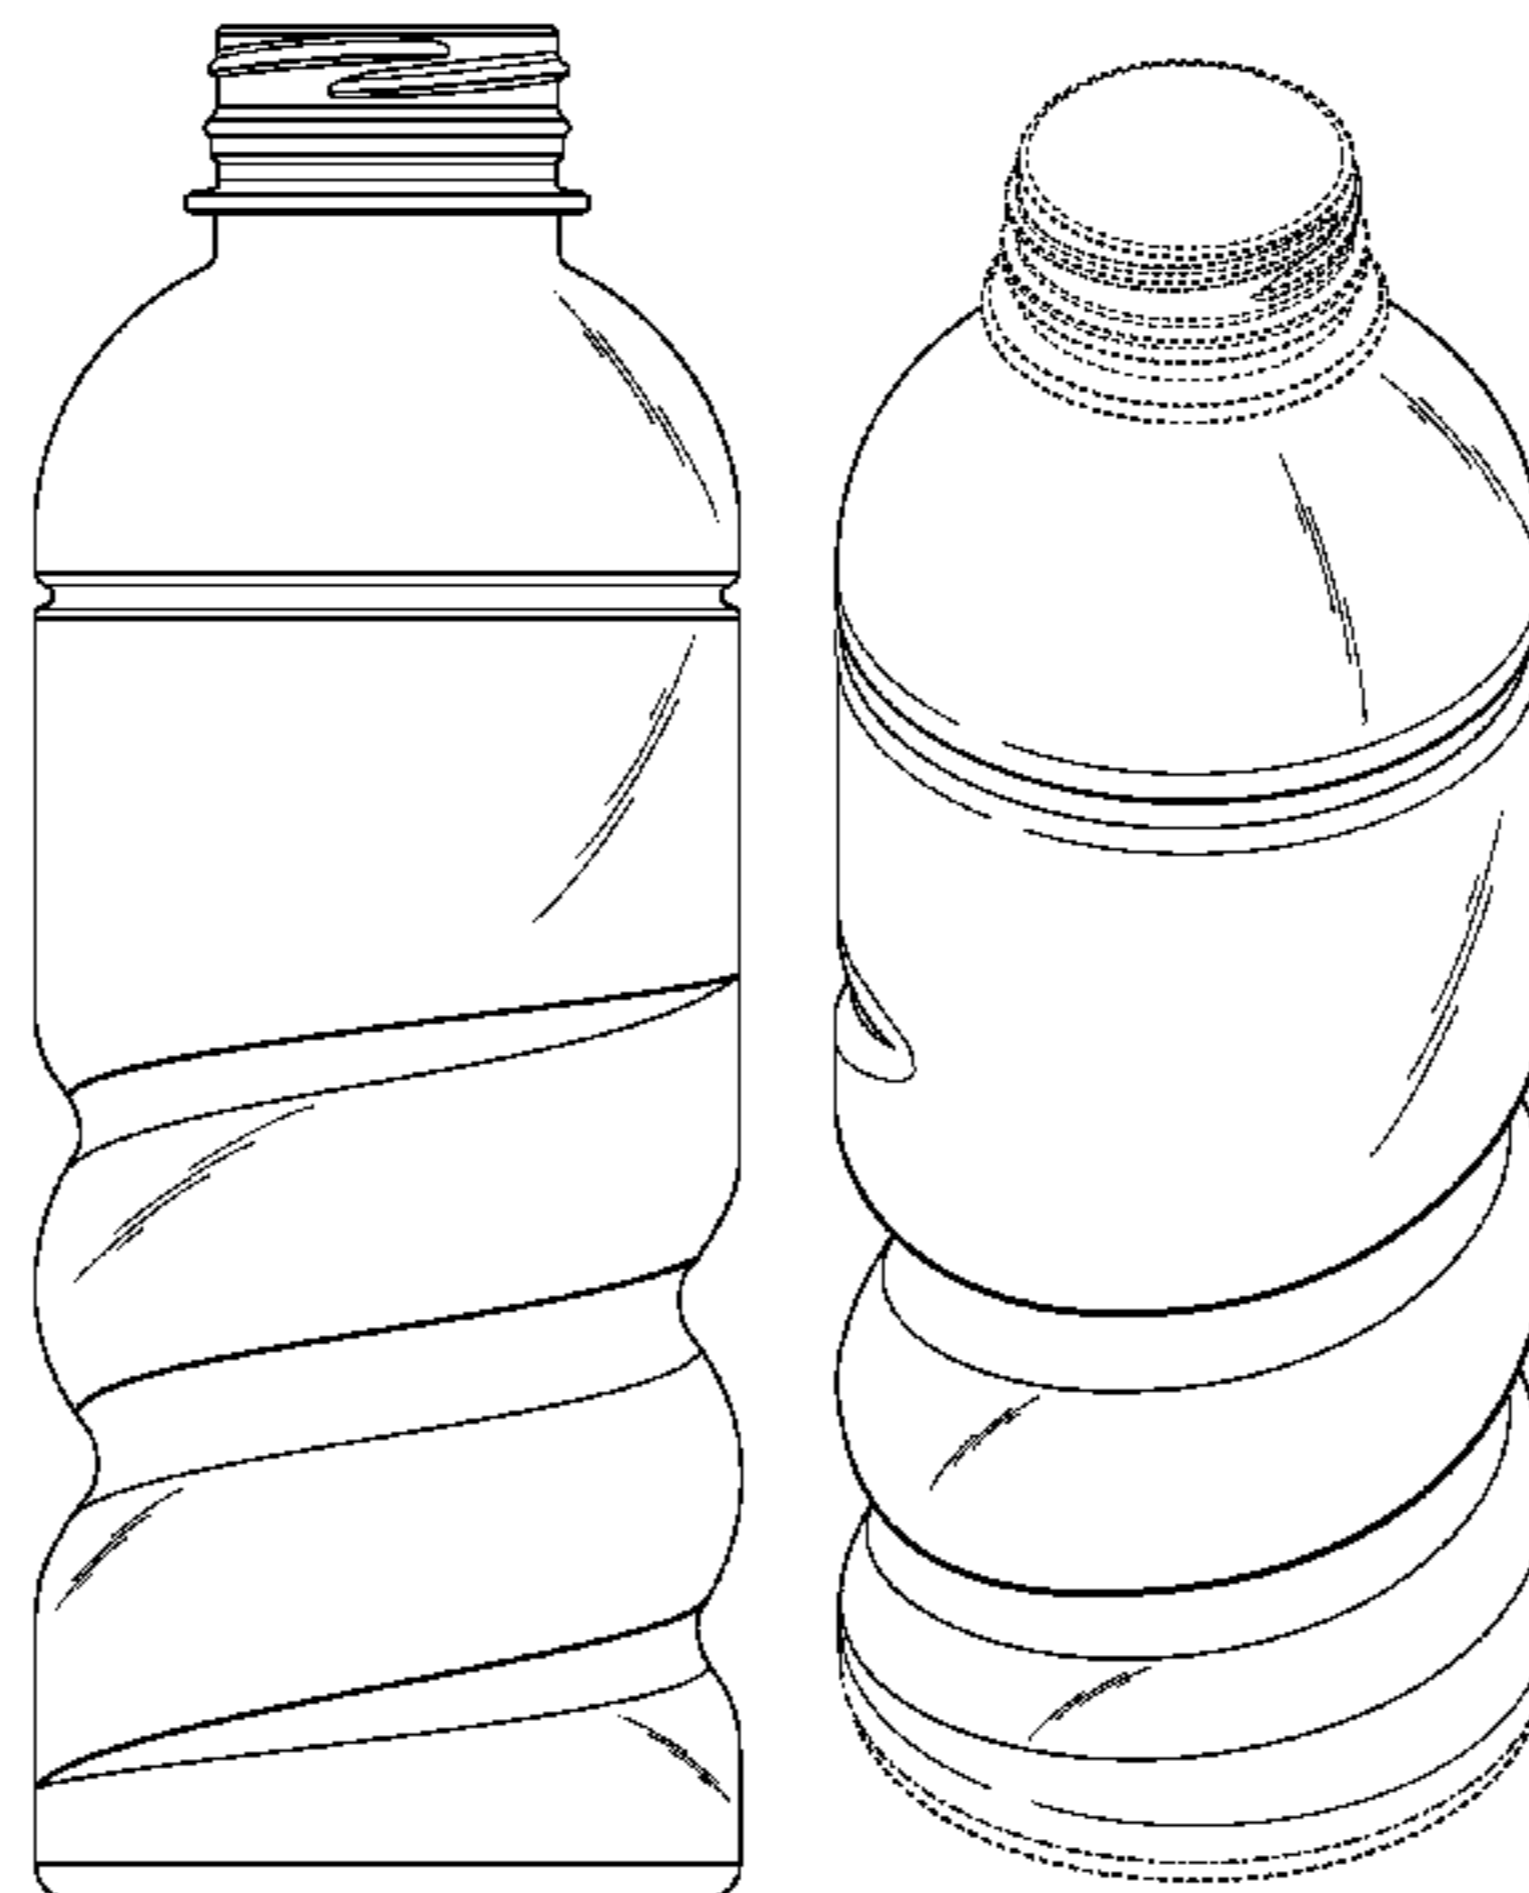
is a top, front, left side perspective view of a fourth embodiment of a bottle showing my new design;
